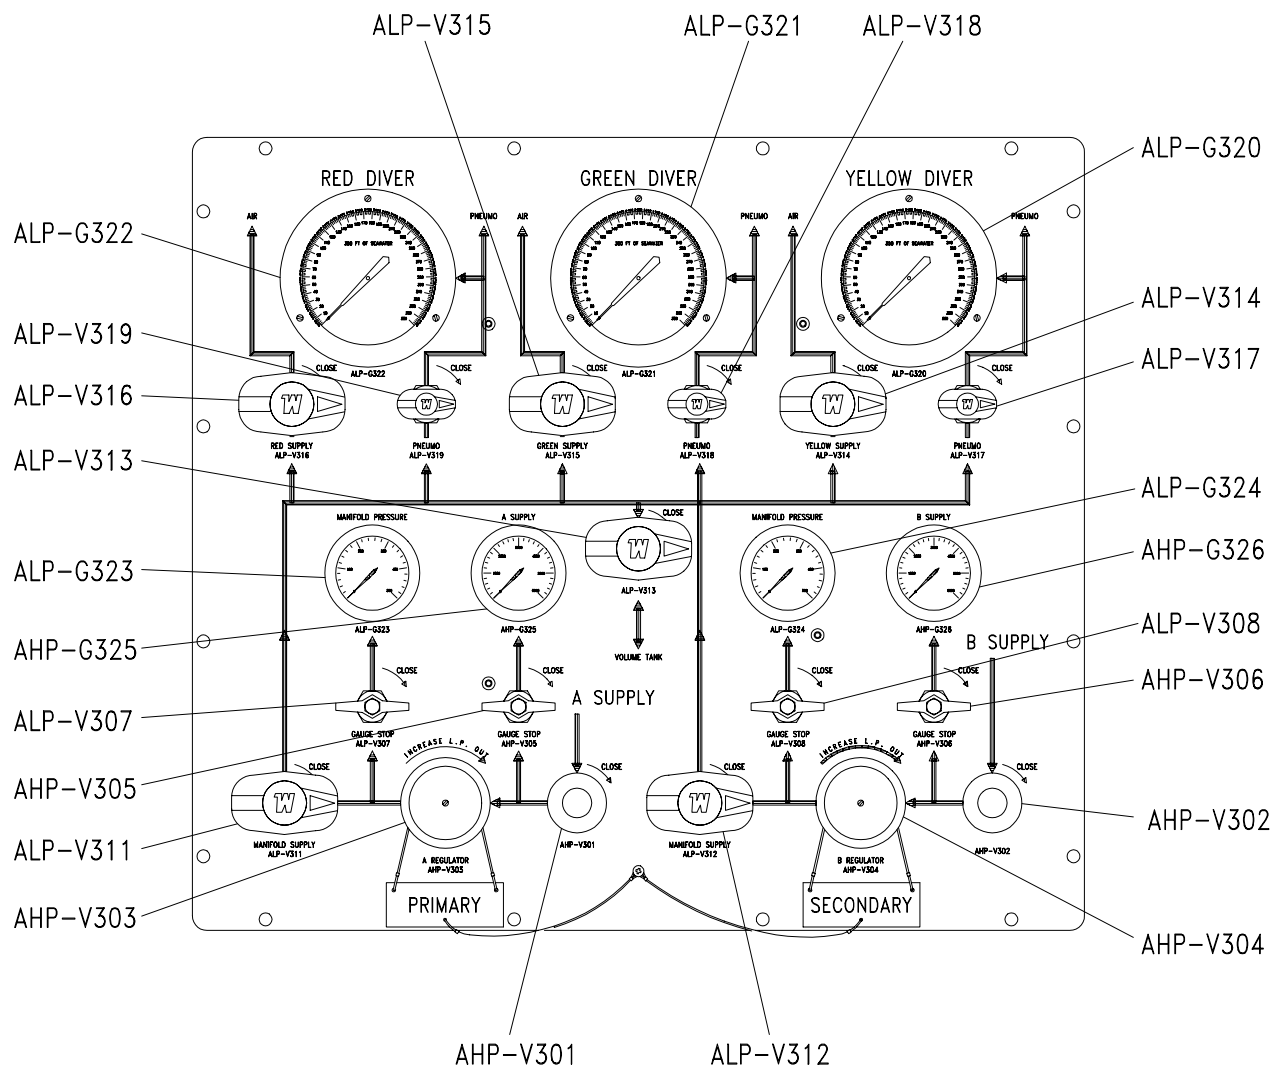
Control Console Assembly, Front View of Front Panel Assembly
